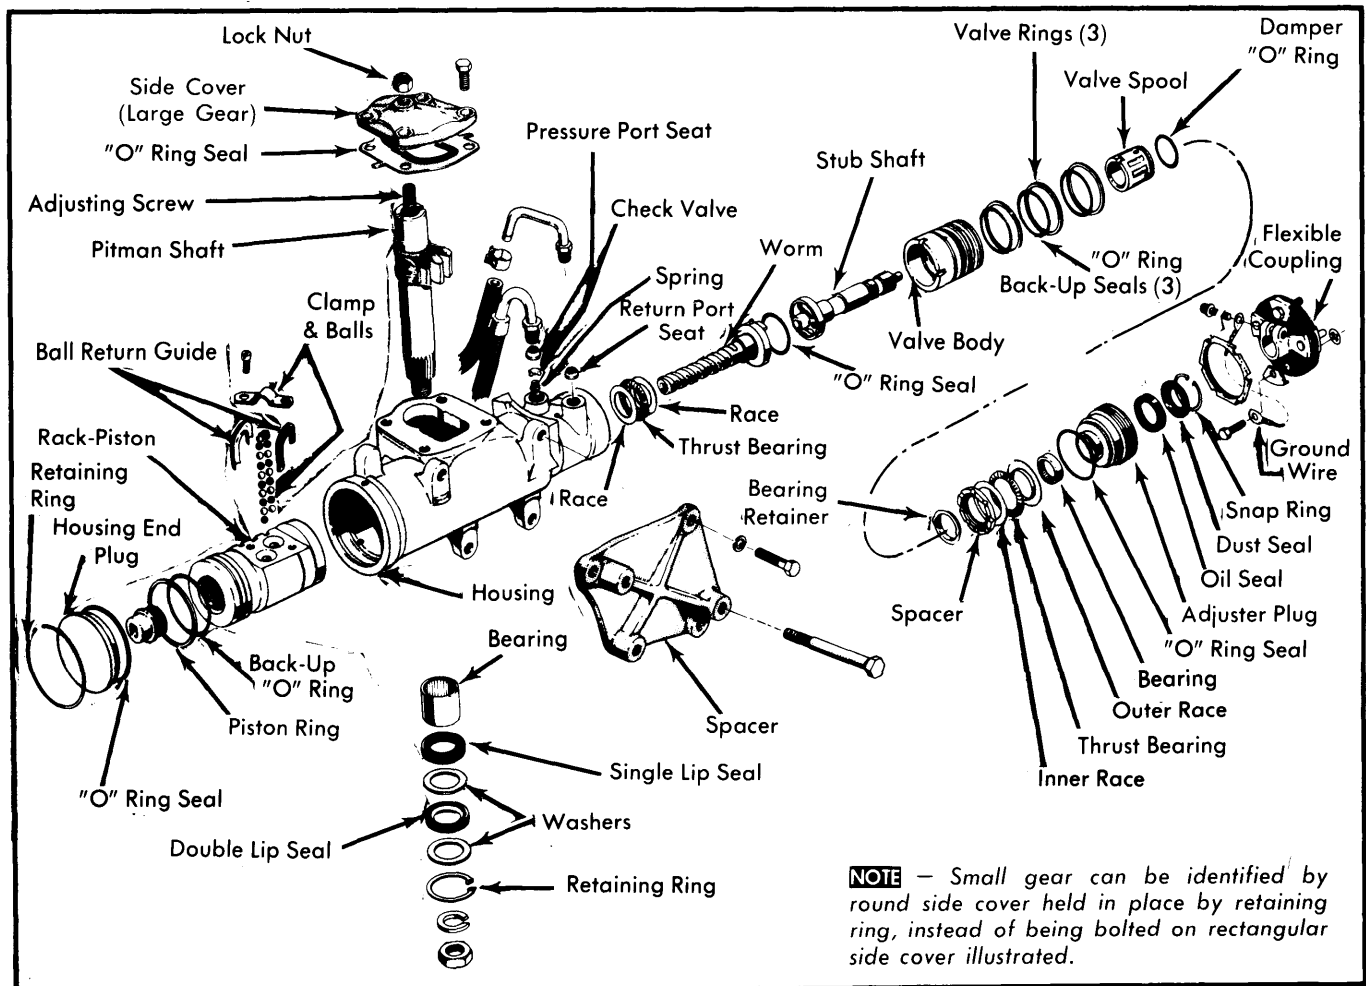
Saginaw Rotary Valve Power Steering Gear (Model 800-808 Shown)
